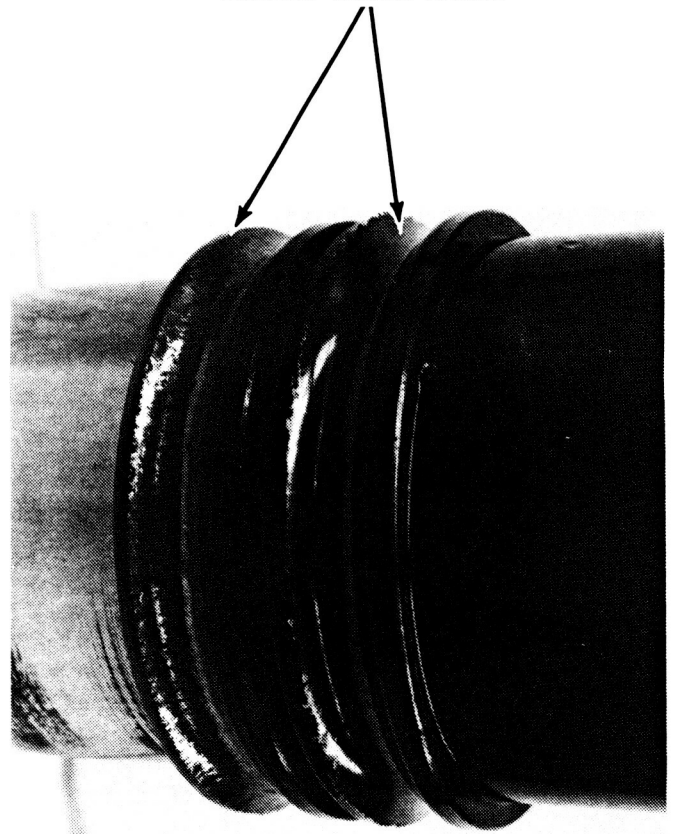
Seal Face and Race After Bearing Failure, Build 20.
